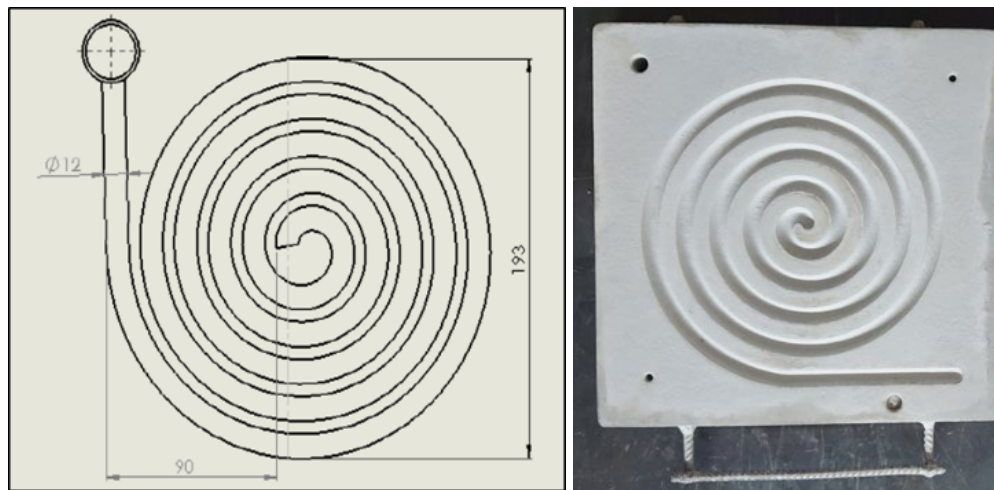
Spiral Fluidity Mold Dimensions and Mold Image
